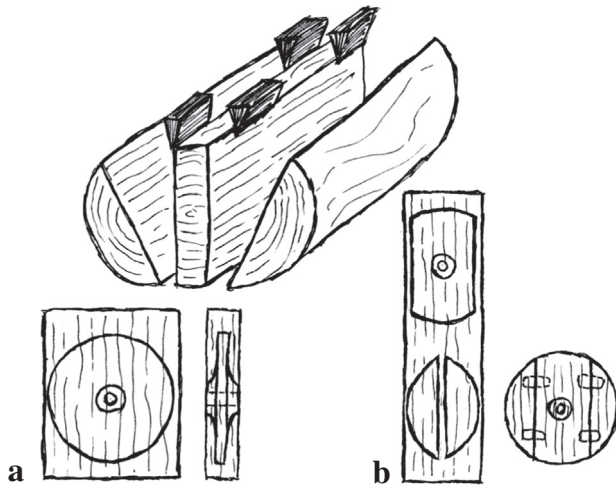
Scheme of wheel fabrication: a) block wheel; b) tripartite wheel.
